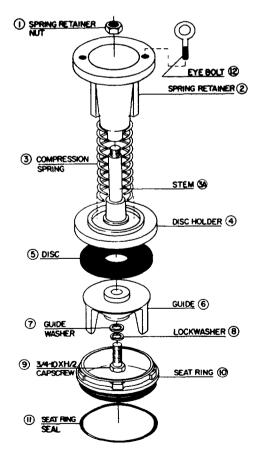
CHECK VALVE ASSEMBLY 8" & 10" MODEL 6CM
